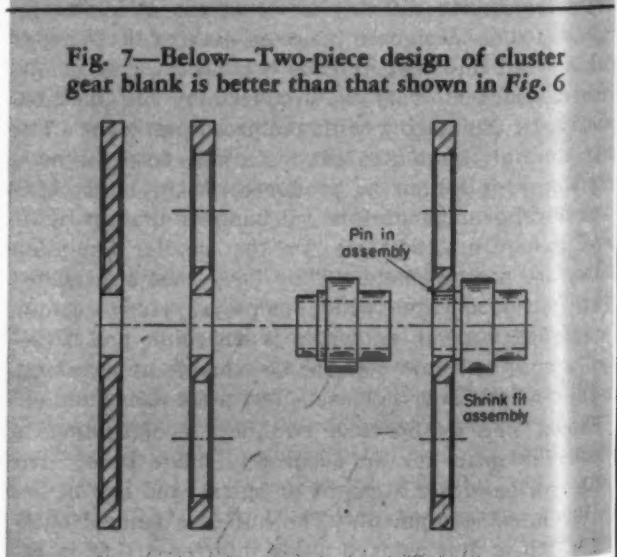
Below—Two-piece design of cluster gear blank is better than that shown in Fig. 6
